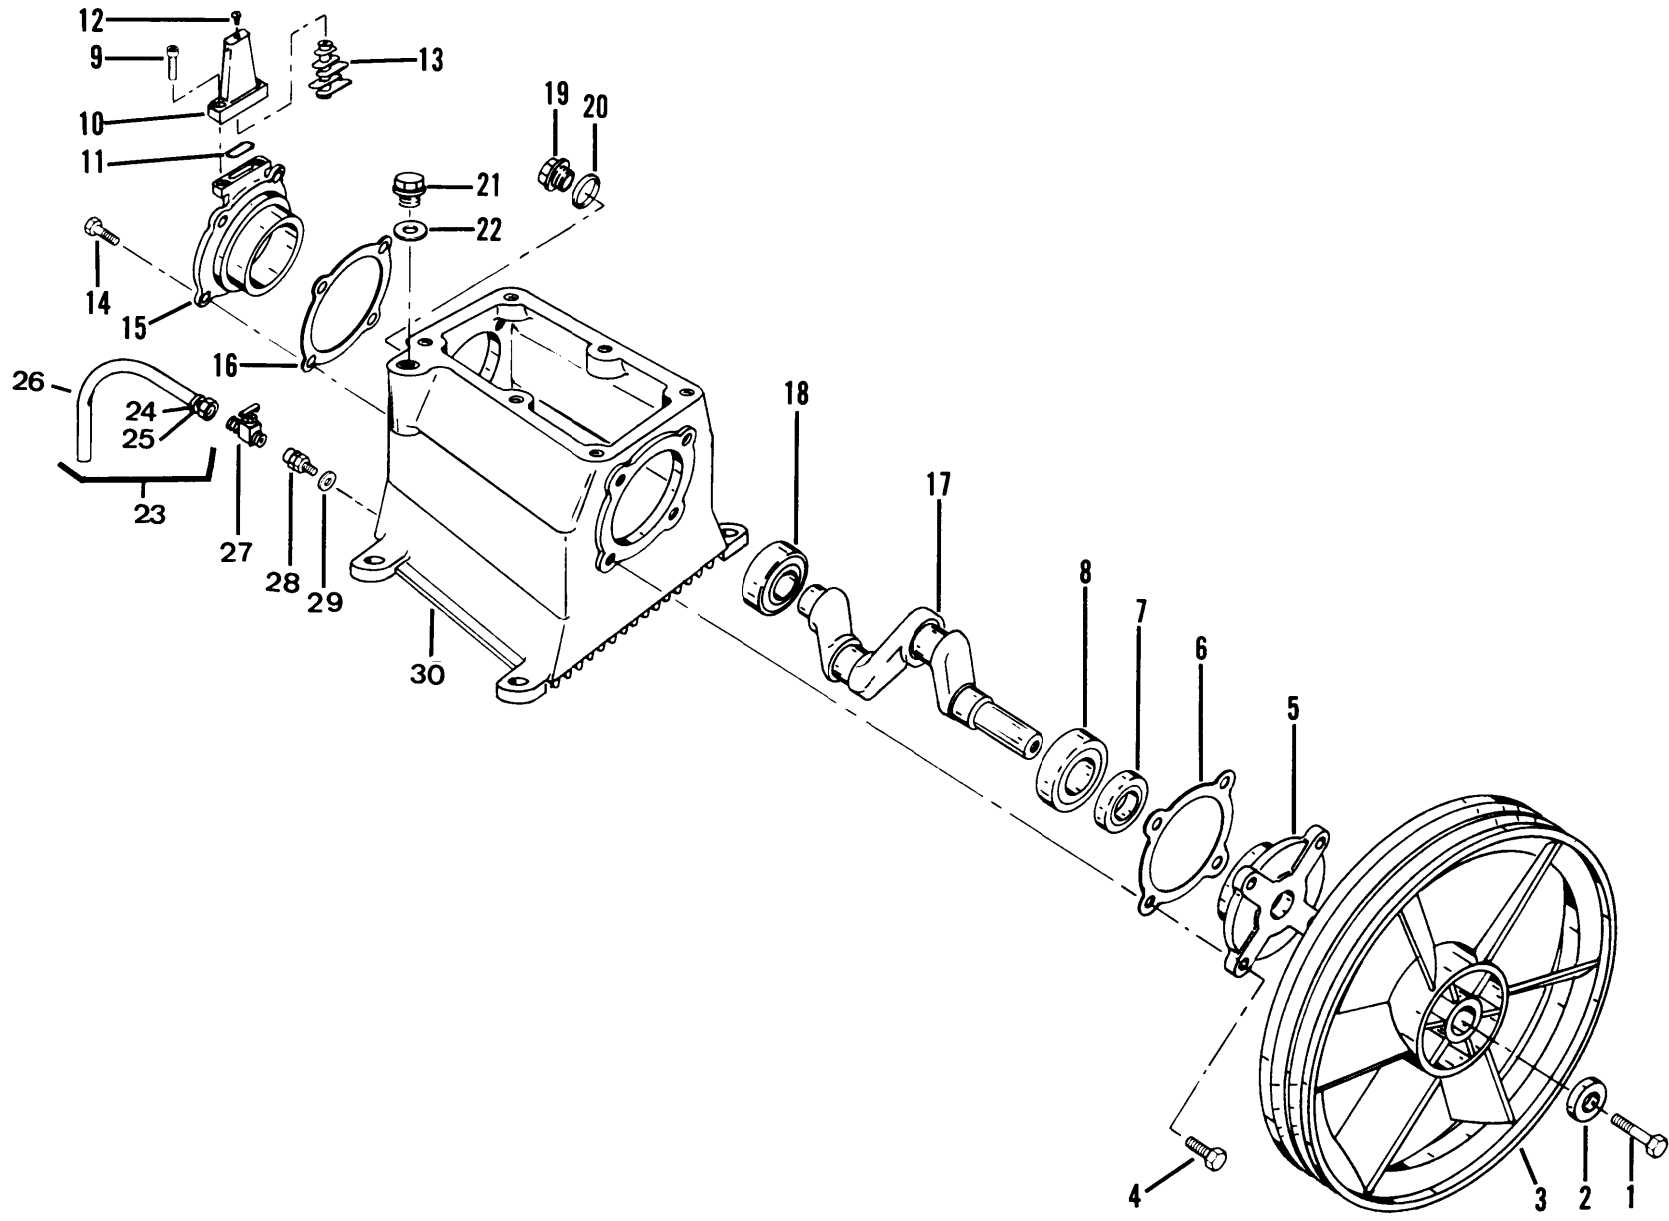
Flywheel, crankshaft, bearings, seal, and frame
